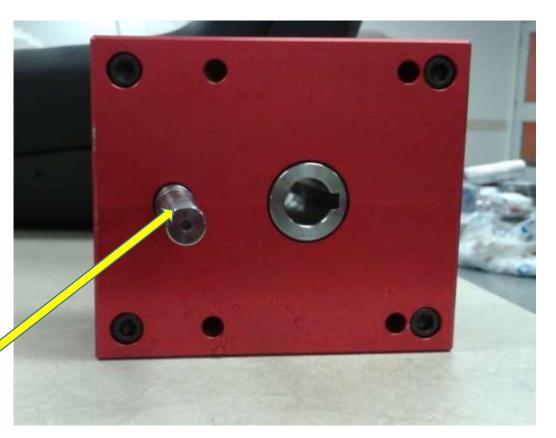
to be installed within +/- 0.5mm along edge of detail #9 as per photo.
